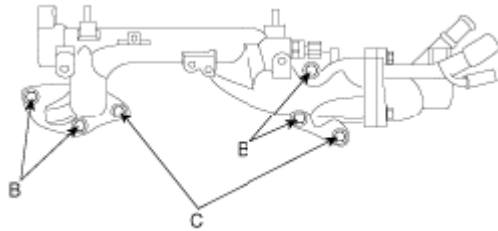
Identifying Water Temperature Control Assembly Mounting Bolts
